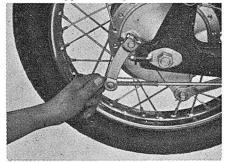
An adjuster nut is provided at end of rear brake rod on some models as shown. Adjustment of other models may be similar to front wheel shown in Fig. 2-41.
